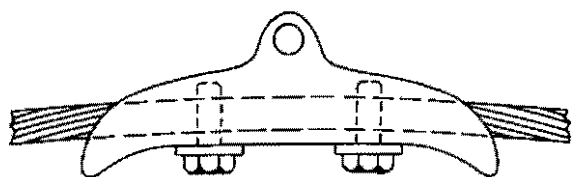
Typical Cable Suspension Clamp for supporting cable at bottom of a suspension insulator.
